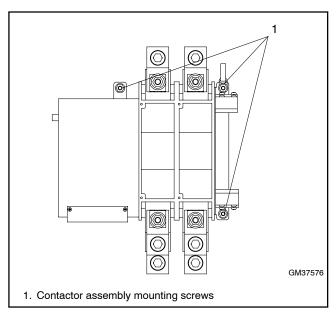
Contactor Mounting Screws, 400 Amp Models
